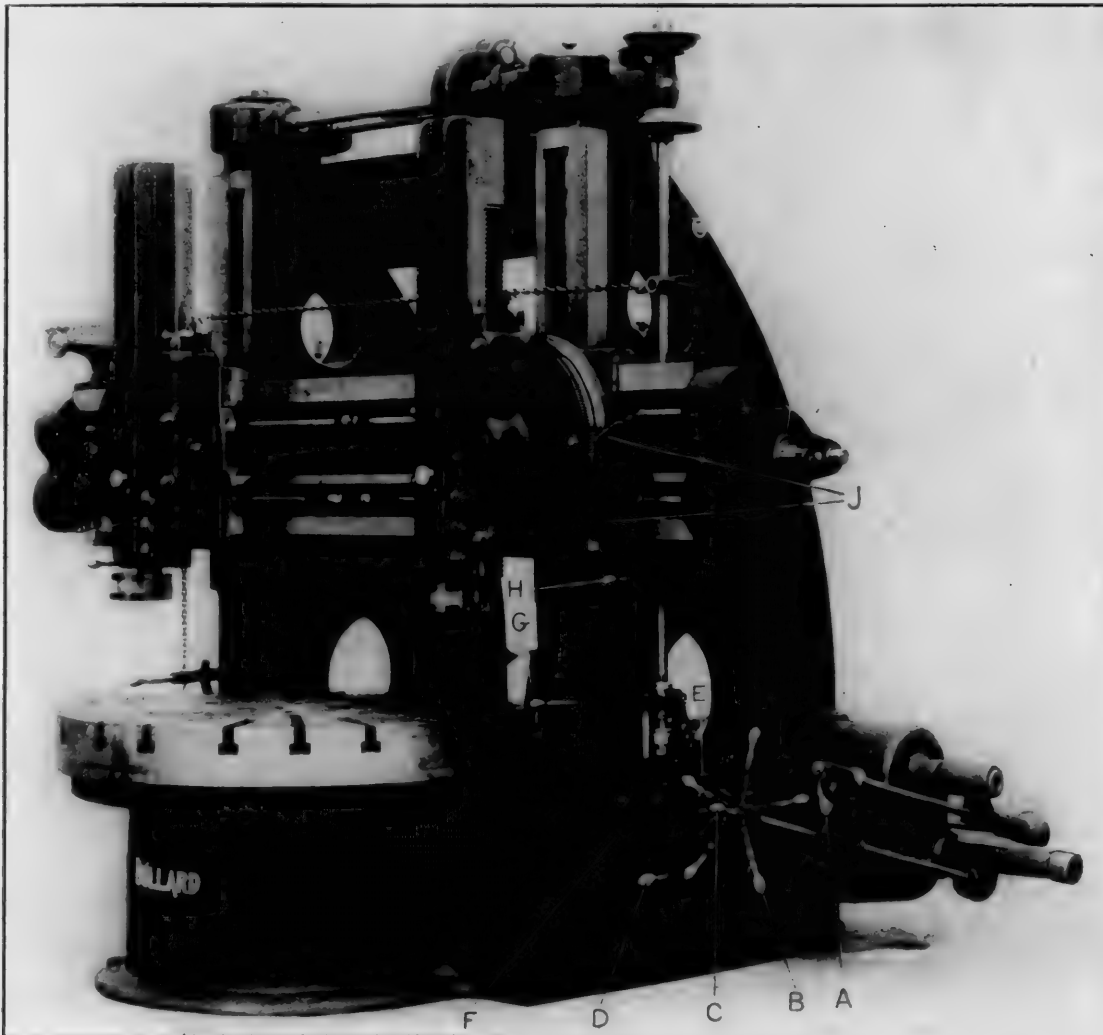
BULLARD 54-INCH RAPID PRODUCTION BORING MILL.
